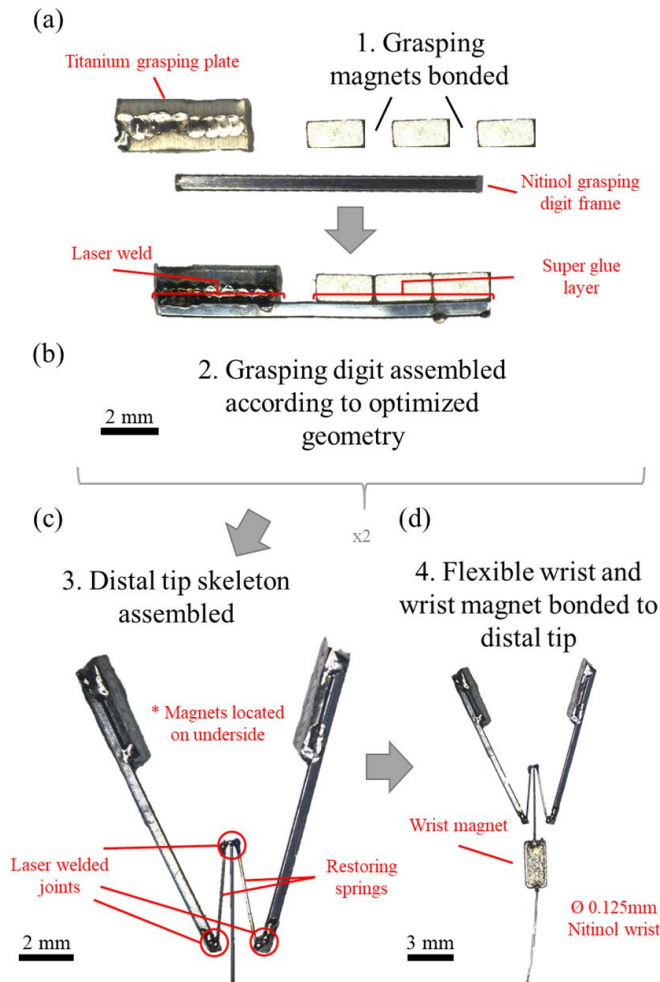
Fabrication process overview. We begin by joining the necessary magnets to generate our target dimension (a). This is bonded to the grasping digit using an adhesive (b). All other joining in subsequent steps is performed by laser welding (c) & (d).
